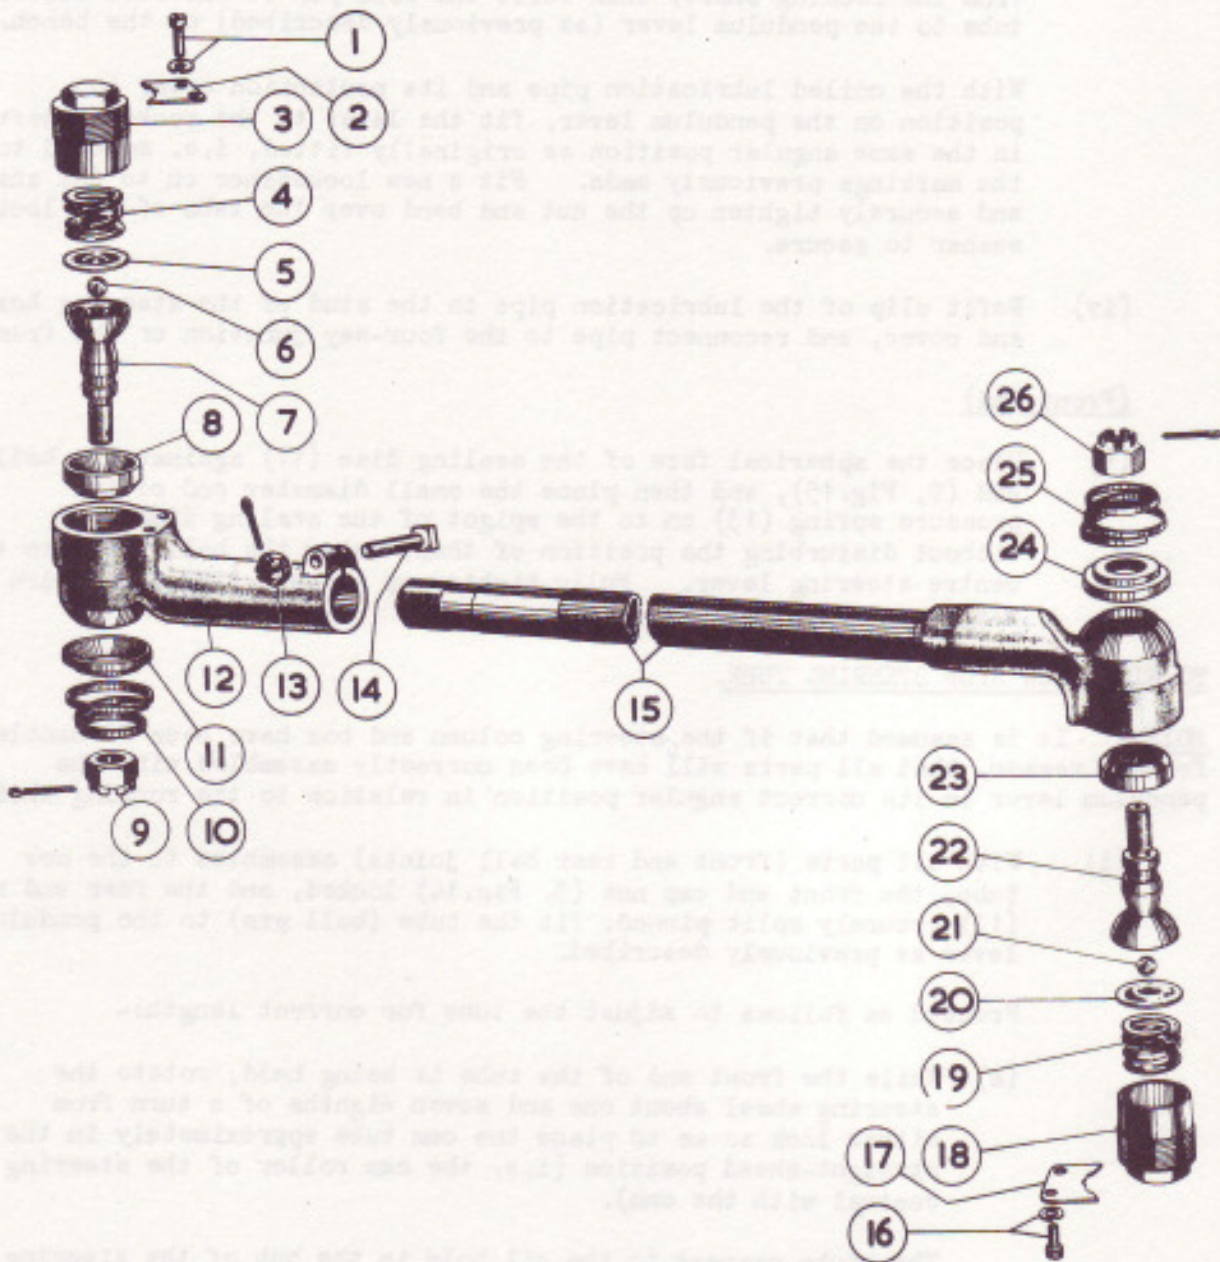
"EXPLODED" VIEW OF A CROSS STEERING TUBE.
